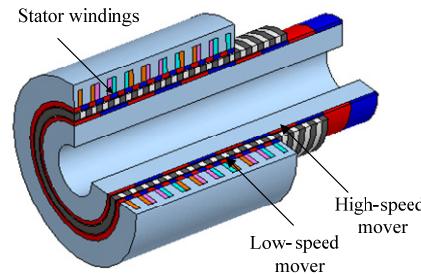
Configuration of the magnetic gear integrated brushless PM machine.
